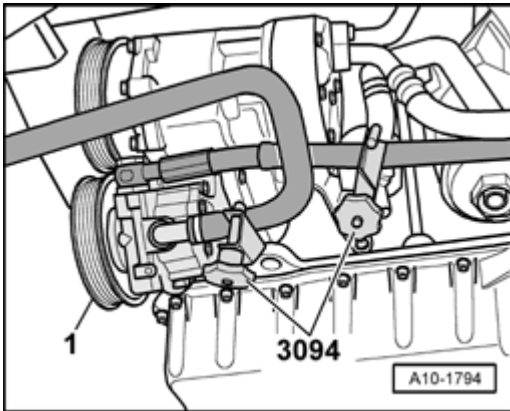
Using Hose Clamps 3094 To Clamp Off Both Hydraulic Hoses To Power Steering Pump
